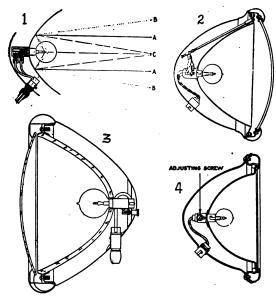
Lamp Focusing Methods. 1—Light Rays Follow Lines A with Proper Focus; with Improper Adjustment They Follow Lines B or C. 2—Focusing Screw at Upper Front Edge of Reflector. 3—Focusing Screw at Rear of Lamp Case. 4—Adjusting Screw in Lamp Socket.
